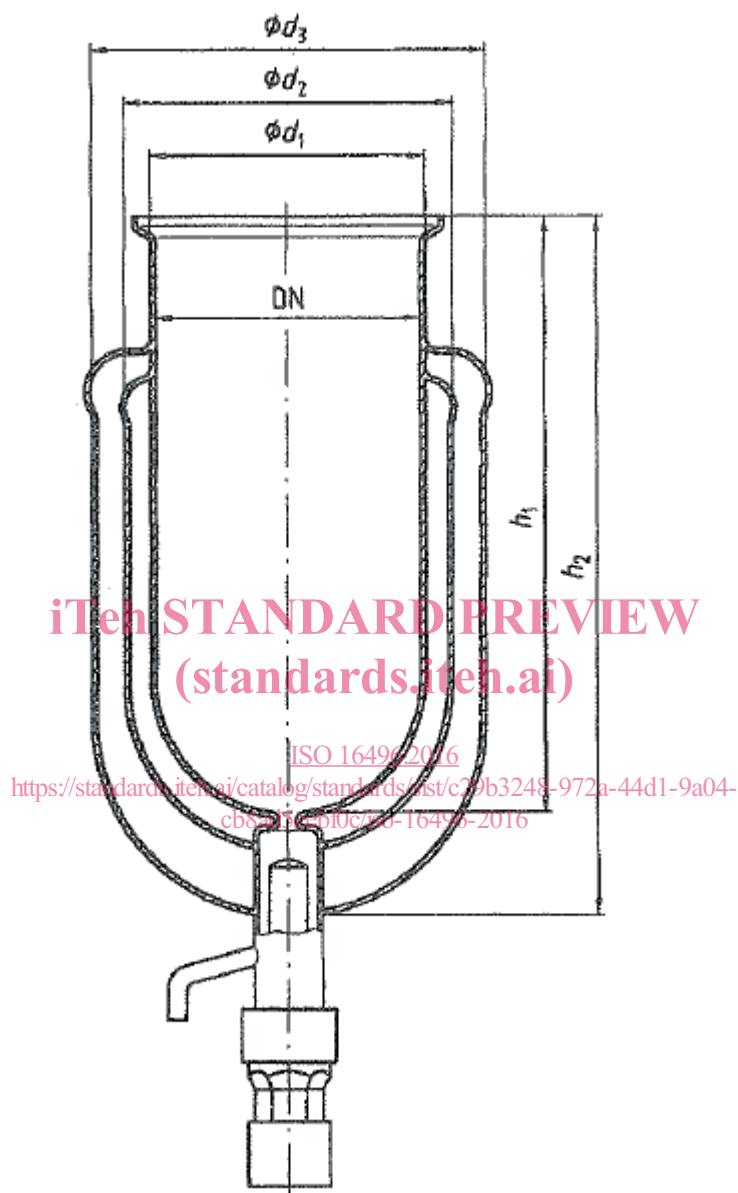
Example for a reaction vessel with outlet stopcock, heating/cooling jacket and flat flange
